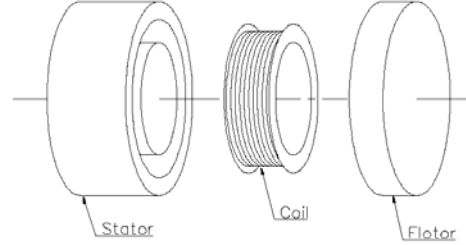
Exploded View of A Solid Cylindrical Actuator
